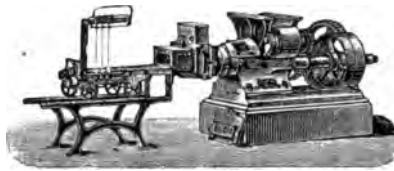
Screw Machine with a Distributing Cylinder (Laeis et Cie.).
